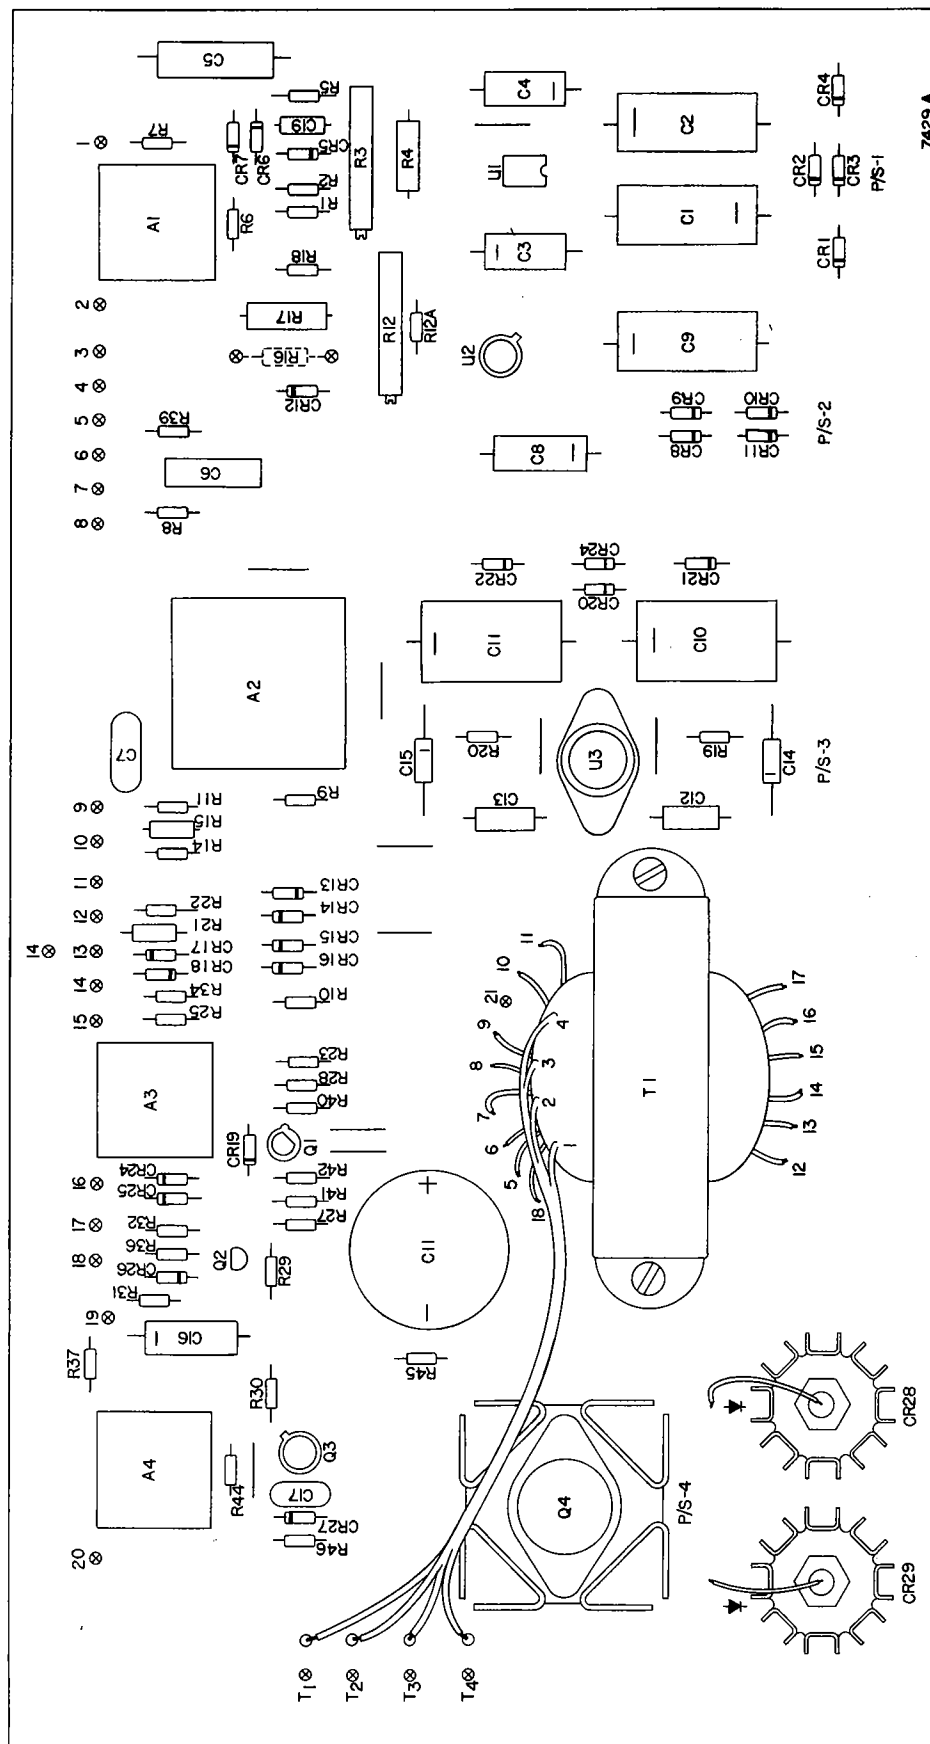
PARTS LAYOUT FOR PRINTED CIRCUIT BOARD
